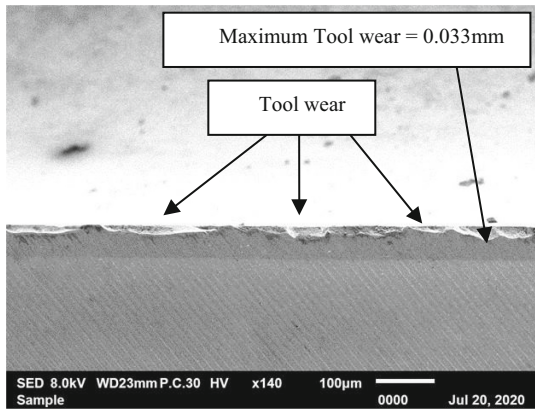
SEM image of end mill tool having 30 μm CER cutting tool and milling with 0.1 width of cut after 4400 mm distance travelled.
